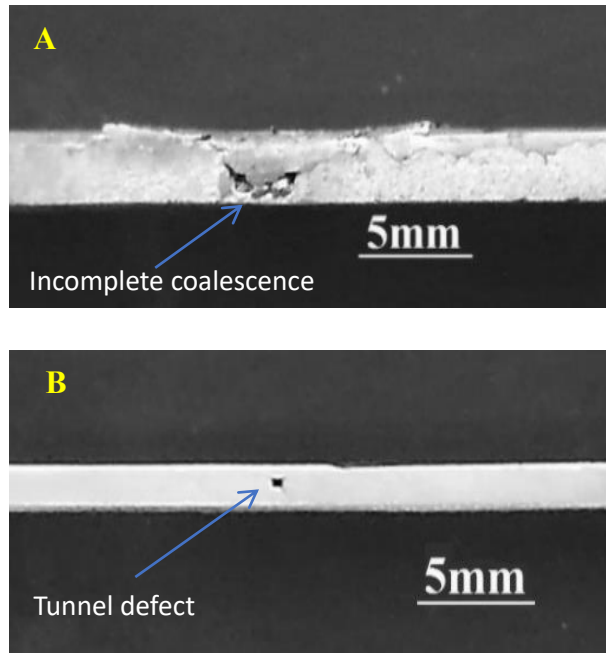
Defects in the welded samples cross section. (b) Similar weld (AA6061-T6) 1400RPM and 45mm/min (a) Dissimilar weld (450RPM and 71mm/min).
